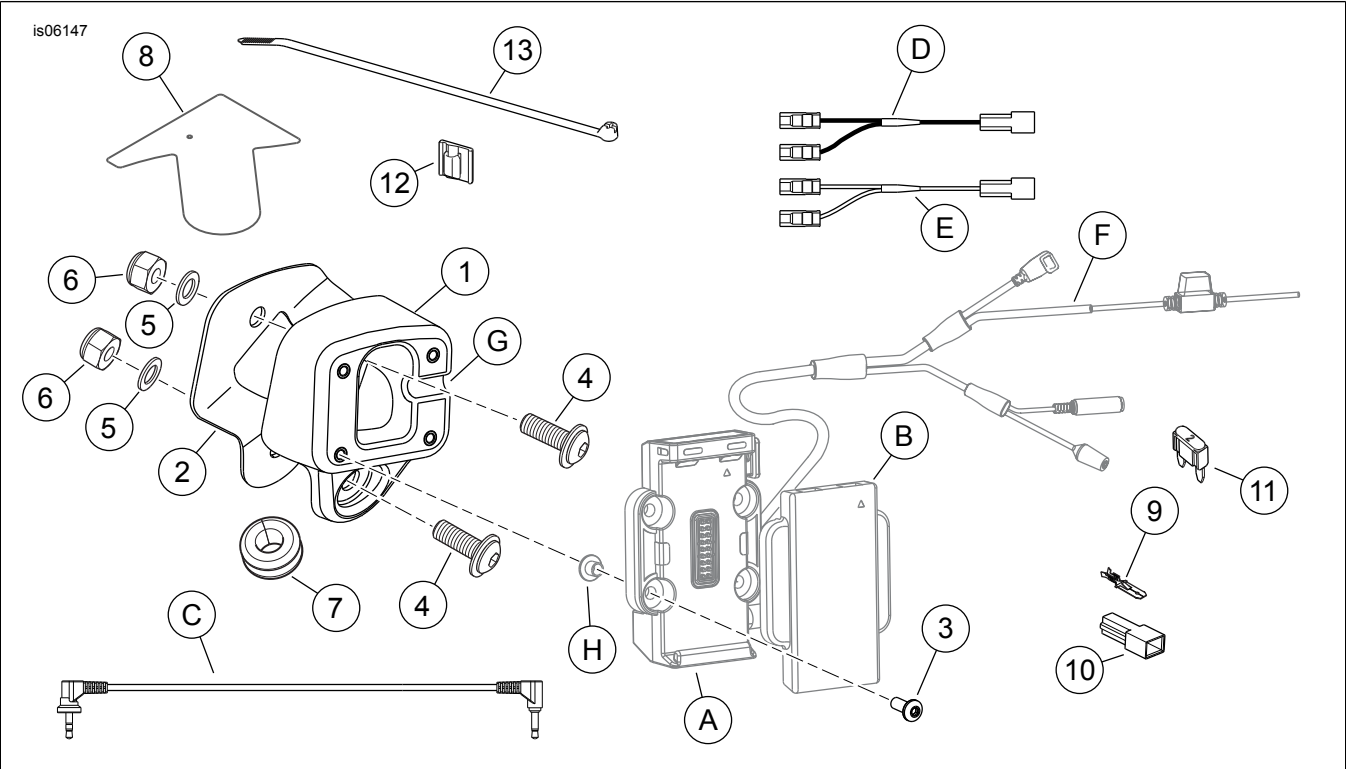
Service Parts, Road Tech 660 GPS Fairing Mounting Kit
